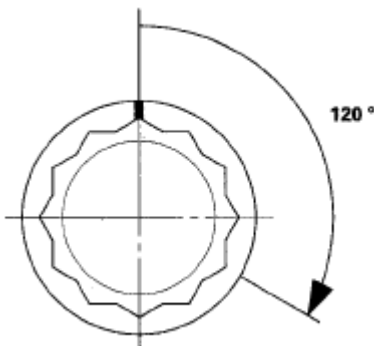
Identifying Connecting Rod Bolt Tightening Angle
